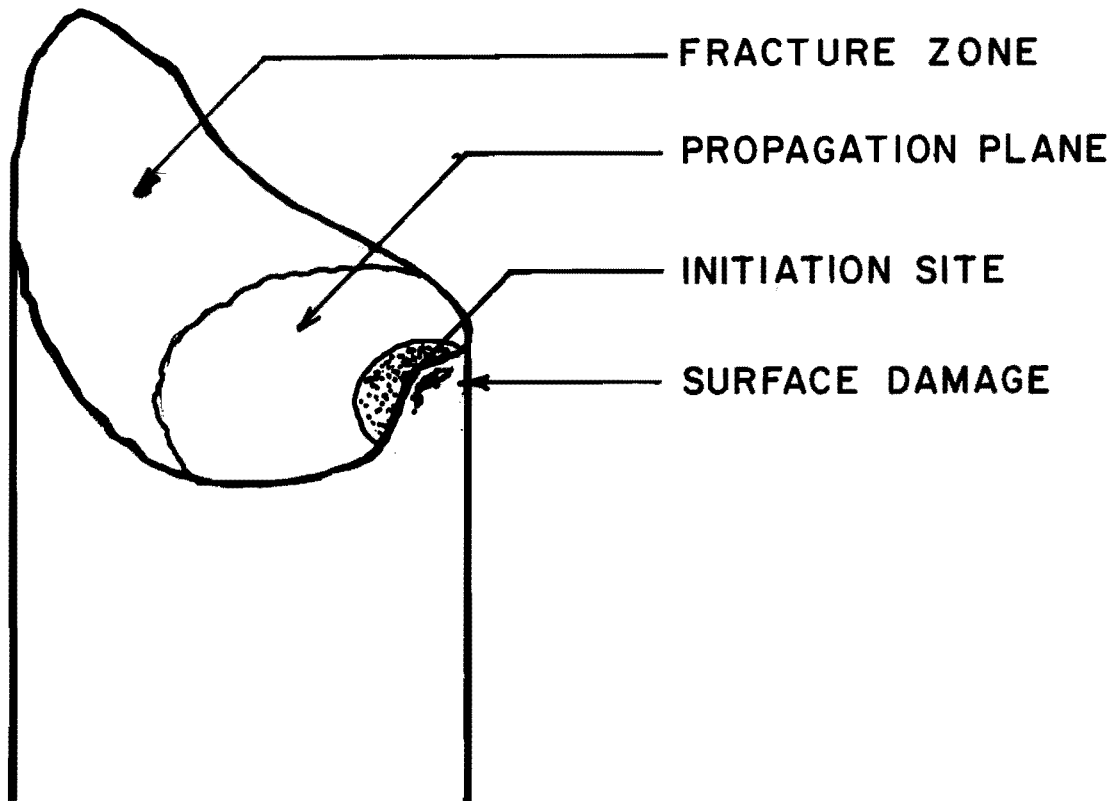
Areas of interest on typical fatigue-fractured wire specimen
